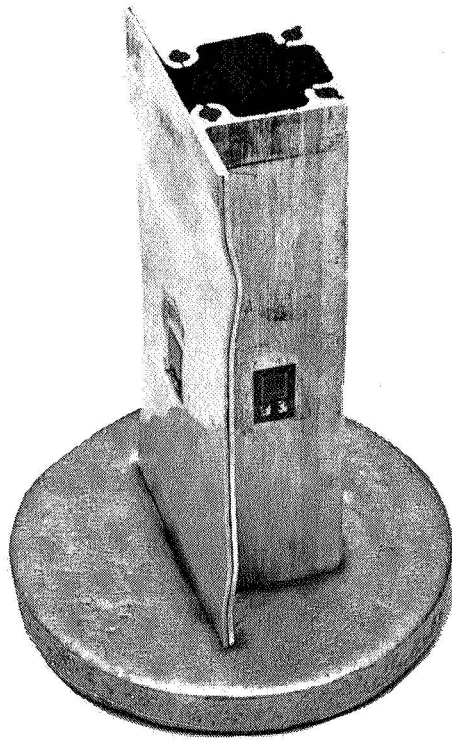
POST TEST – HAT SECTION STRINGER CRIPPLING SPECIMEN NO. 1
